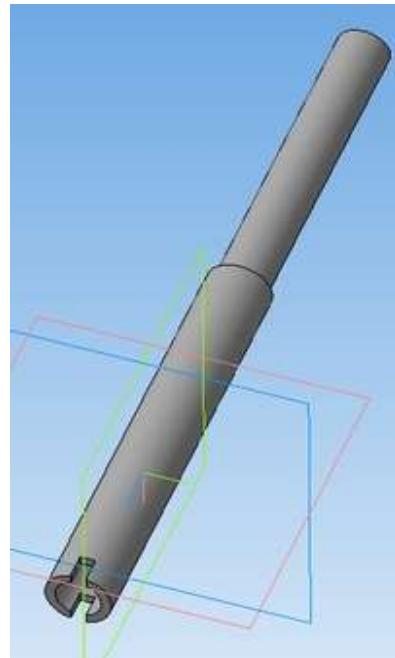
Three-dimensional model of a tubular drill bit (diameter of 10 mm)
